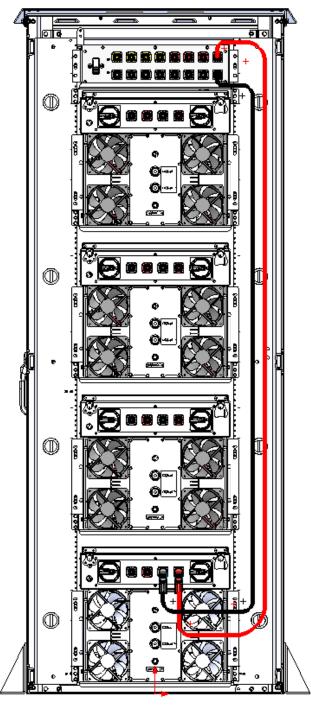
SURLOK CABLING ROUTED TO SECONDARY (OUTPUT) FEED #4
